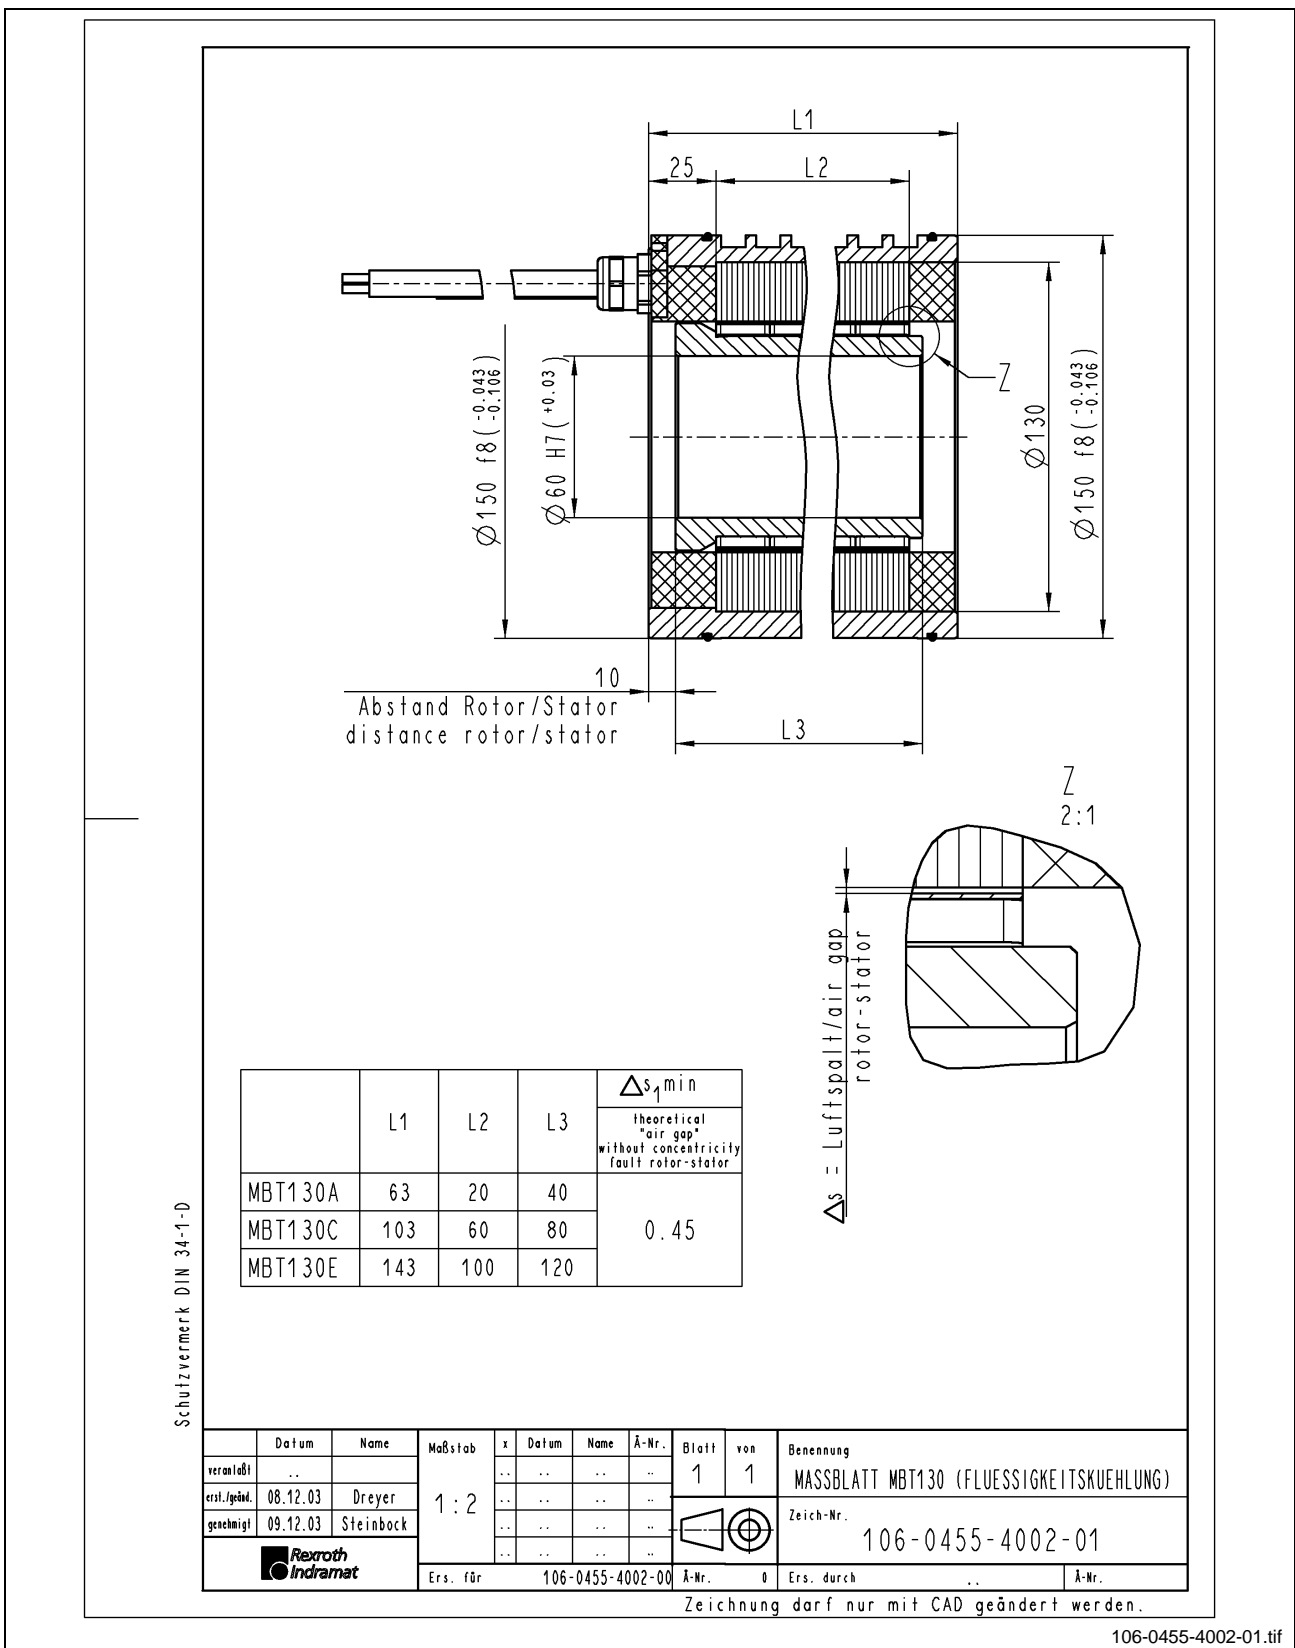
Dimension sheet MBT130 with liquid cooling
